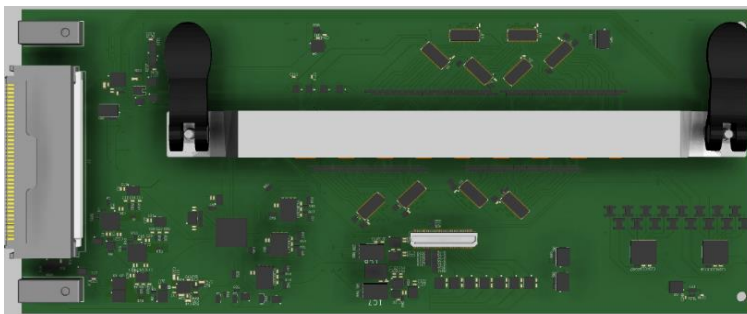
Top view of the PS-FEH test card with the POGO mechanical assembly.
